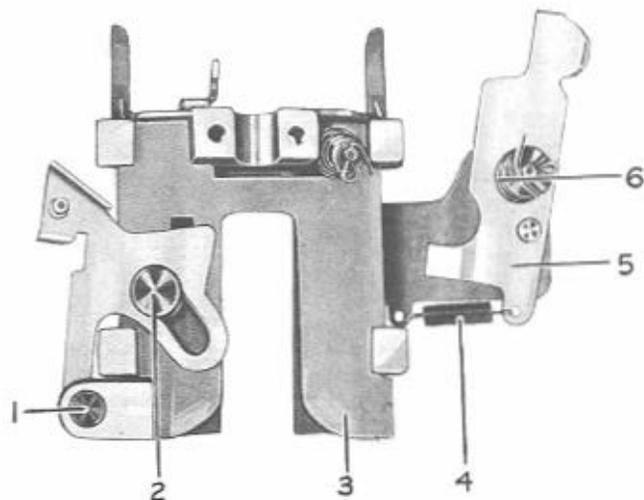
No. 11946-A Selector Slide and Cancel Plate Assembly (Back View)
